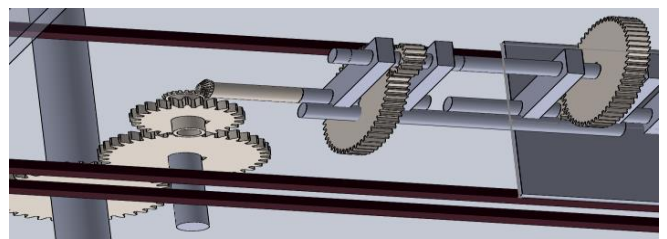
wheels are connected to output of main reduction box with the help of drive train assembly'
